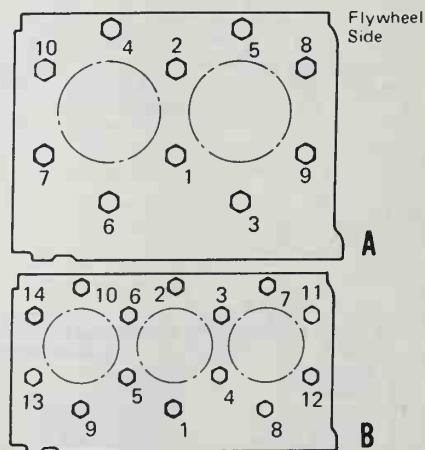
A - Follow sequence in diagram A when tightening cylinder head fasteners on two-cylinder models or diagram B on three-cylinder models.
